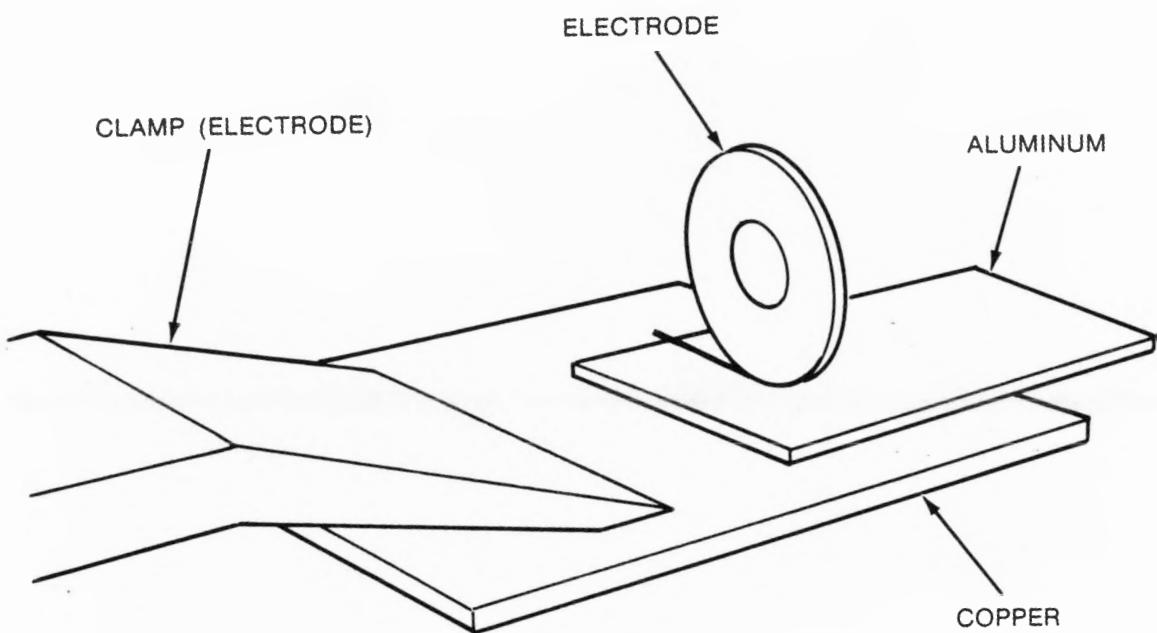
Parallel Gap Resistance Seam Welding
